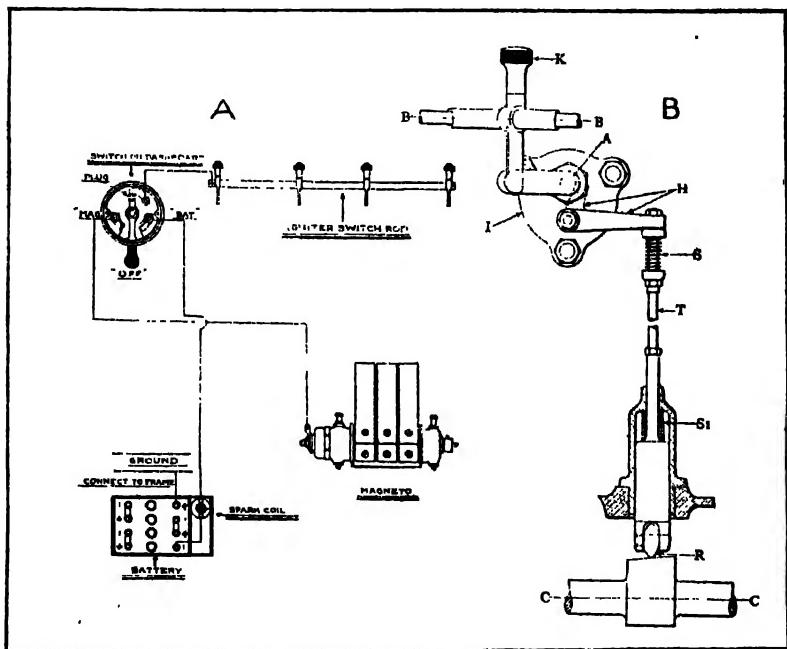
The Locomobile Low Tension Ignition System and Igniter Used for Producing Spark in the Cylinder.
